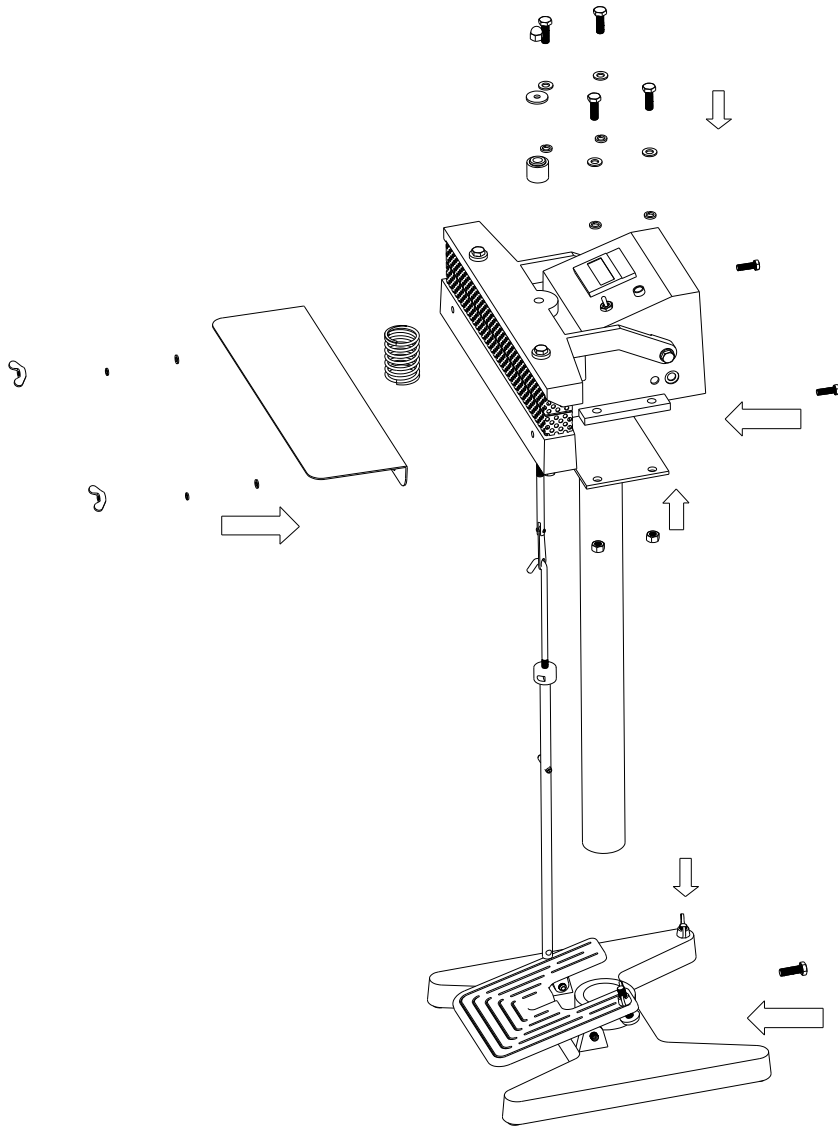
External Axonometric Drawing of the Direct-Heat Type
